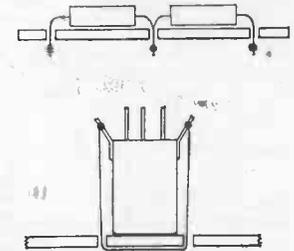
MOUNTING COMPONENTS ON THE PANEL
